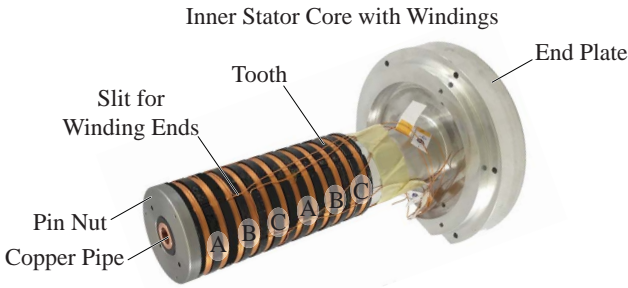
Three-phase linear stator prototype attached to the end plate. The stator core material is machined from ST52 steel. The small slits in the teeth are used for the winding ends that are brought towards the end plate.
